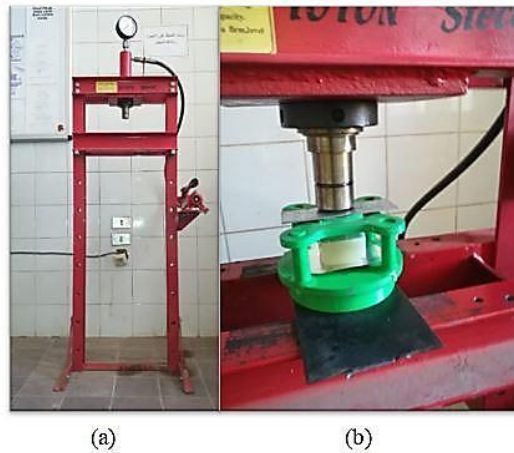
(a) Hydraulic Press, (b) Sheet Drawing Process.
